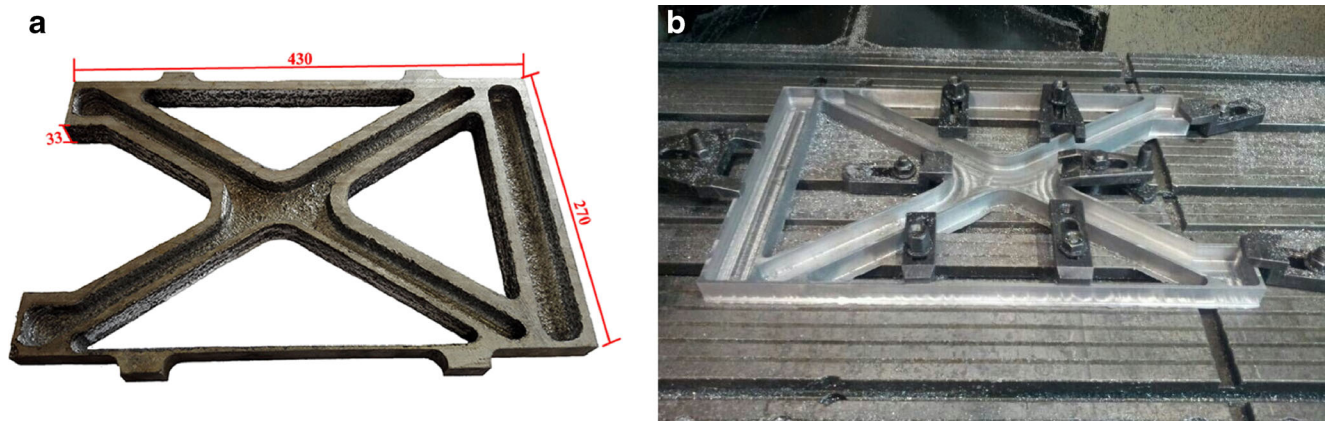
SiC/Al workpiece: a rough machining by BEAM and b finish machining by cutting processes
